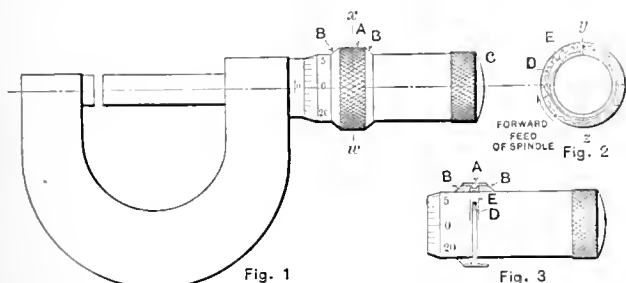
, 2 and 3. Improved Form of Ratchet Stop which can be Operated by the Fingers of the Hand holding the Micrometer.
